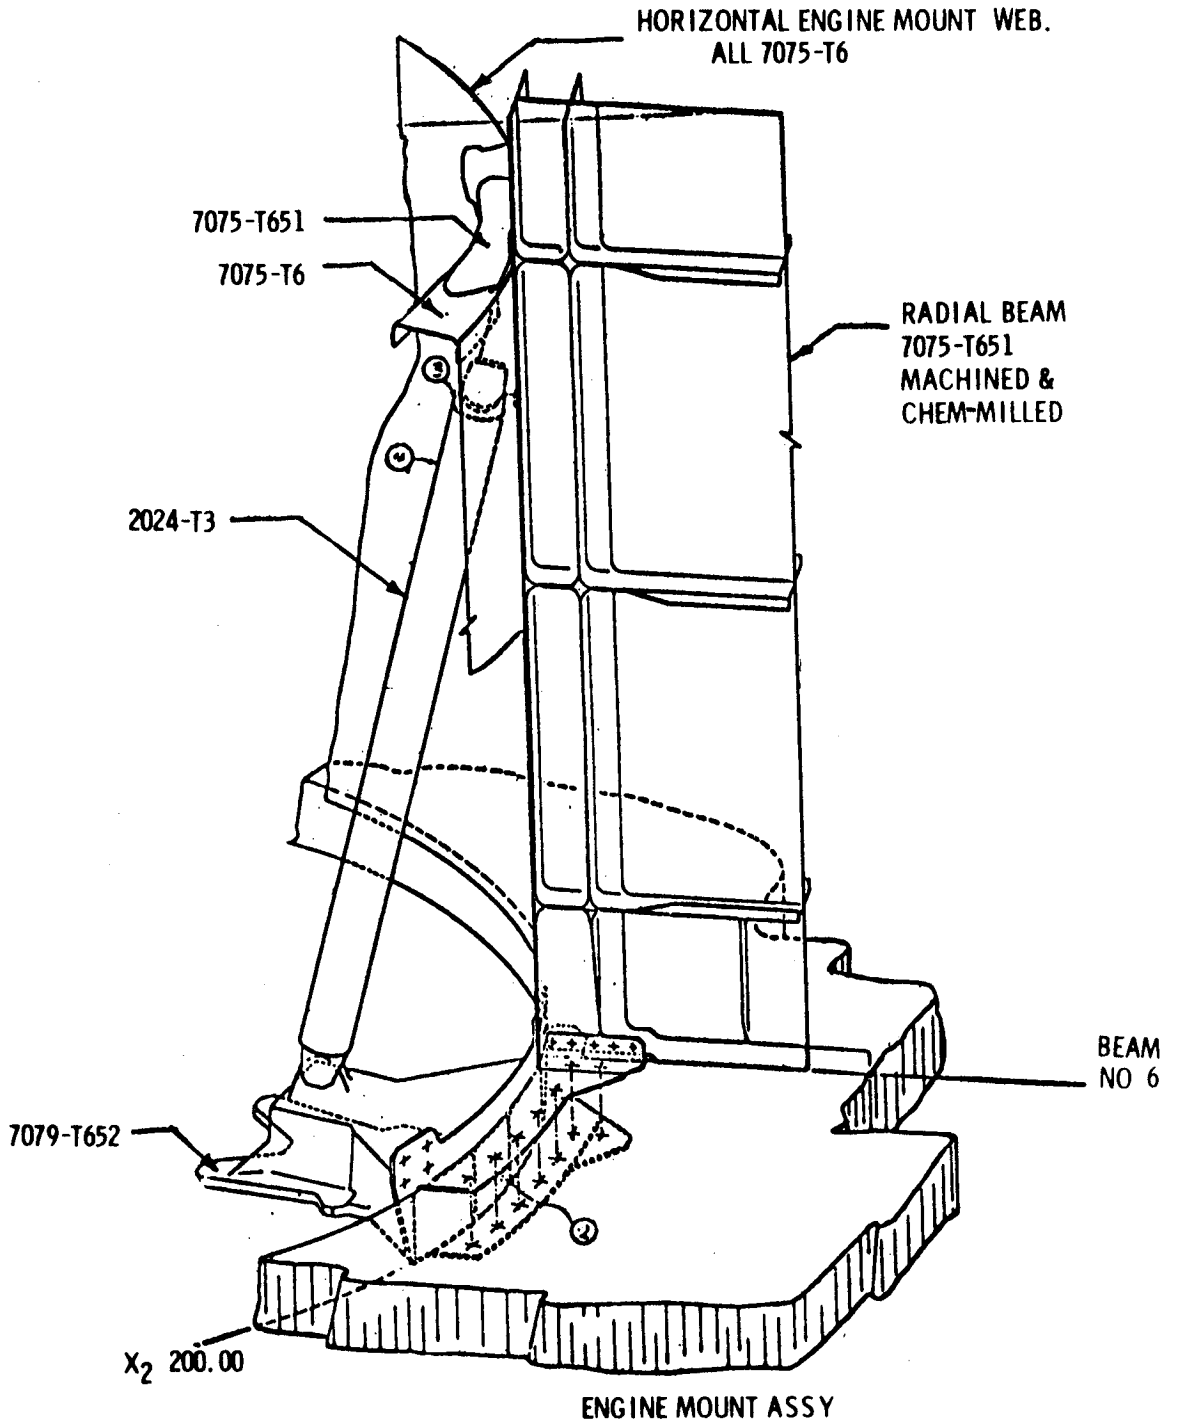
TYPICAL MATERIAL USAGE IN THE SERVICE MODULE ENGINE MOUNT ASSEMBLY
